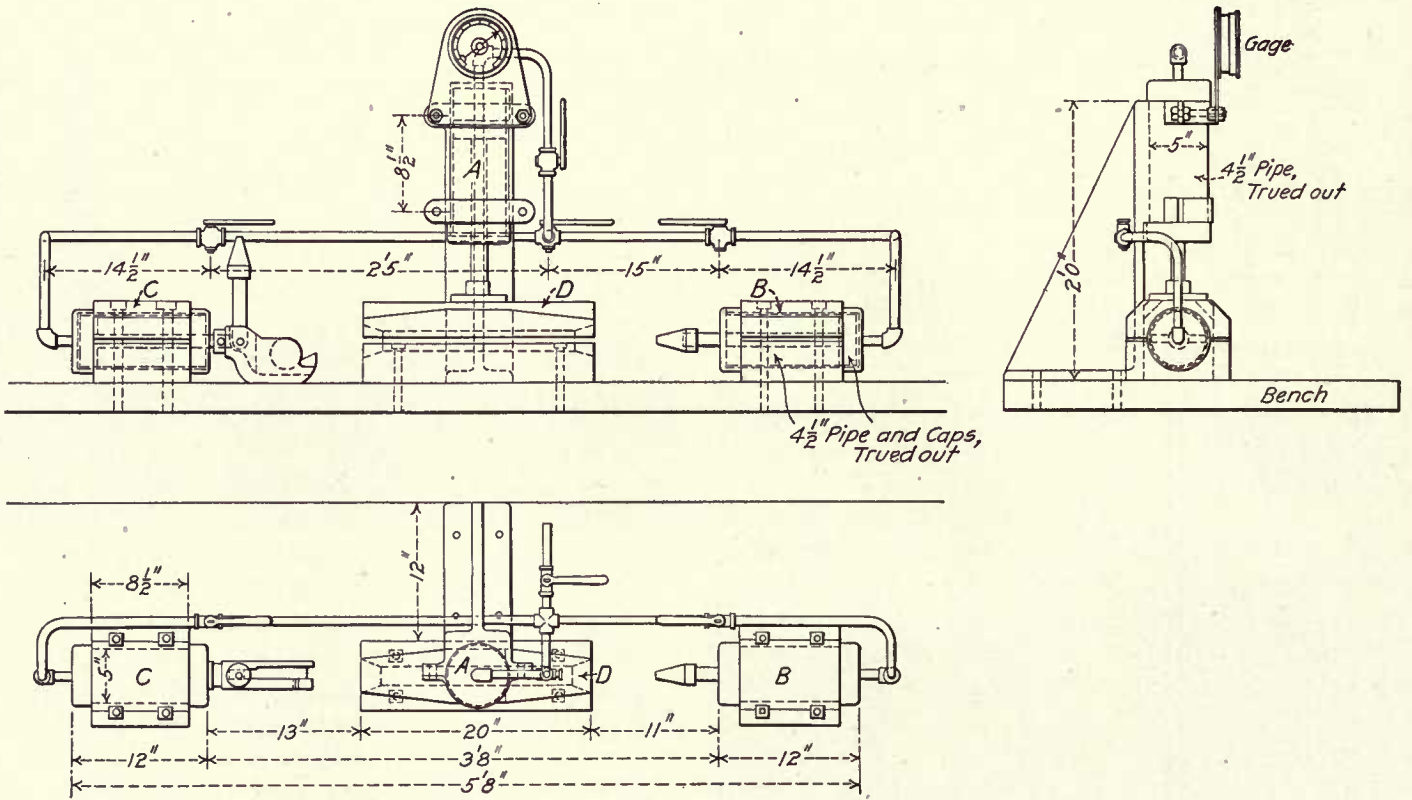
Machine for Fitting Coupling and Nipple on Air Hose.
